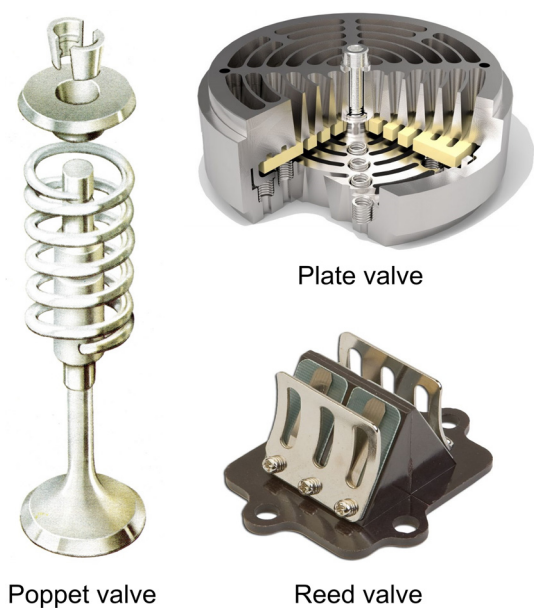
Various valve types used in reciprocating engines and compressors.^{26–28}
